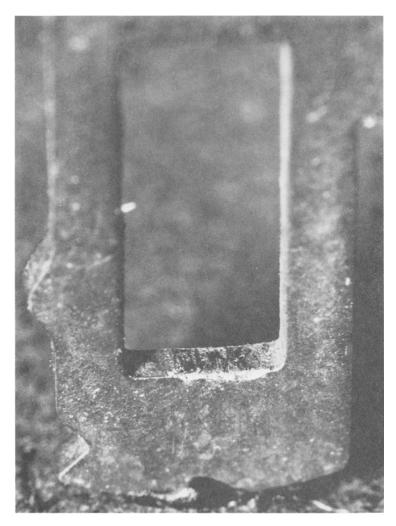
Ilco disc tumbler from a lock cylinder that had been picked with a rake pick. Tumbler width is 4.85 mm (0.191 in.) and thickness is 0.73 mm (0.028 in.).
